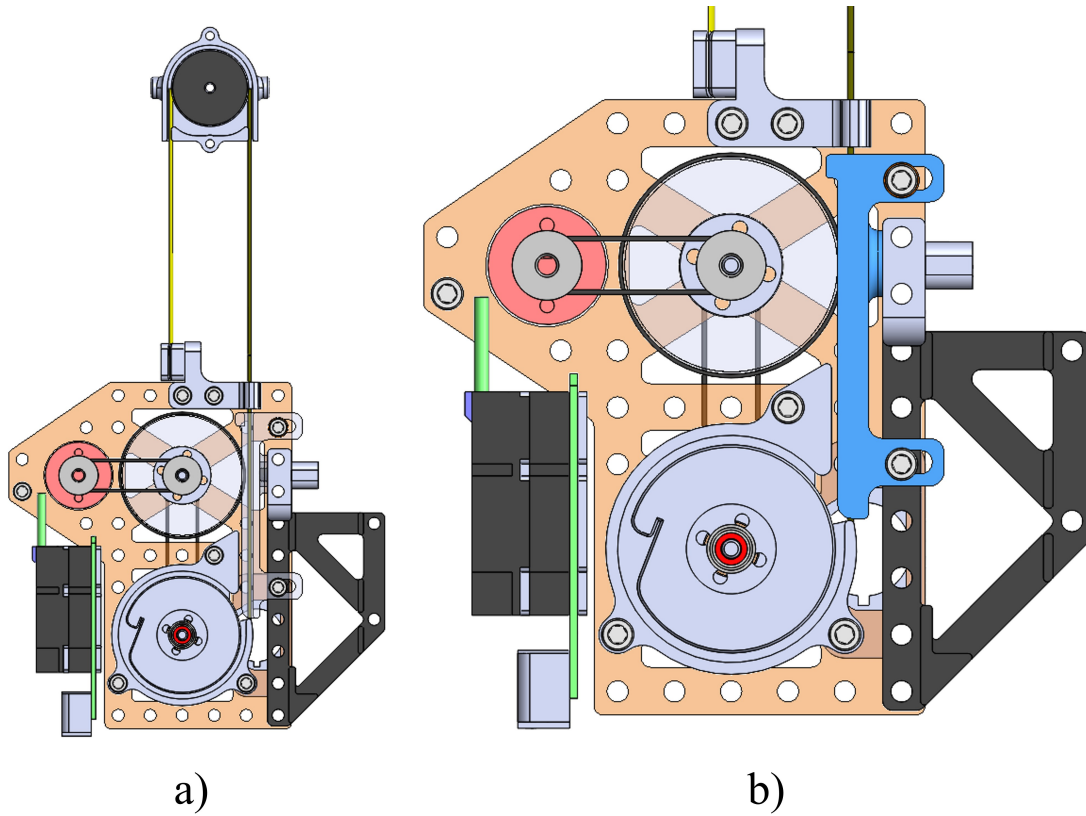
a) CAD of EEMMMa limb internal layout, showing the overall U-shaped tape and drive pulleys. b) Close-up view of the main body. The top output roller is transparent to show the drive pulleys behind it. The tension management backing channel is highlighted in blue, which presses against the tape and the output roller to maintain tension.
